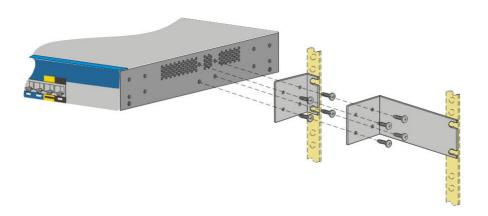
Bracket installation for front mounting on a 19- and a 23-inch rack
